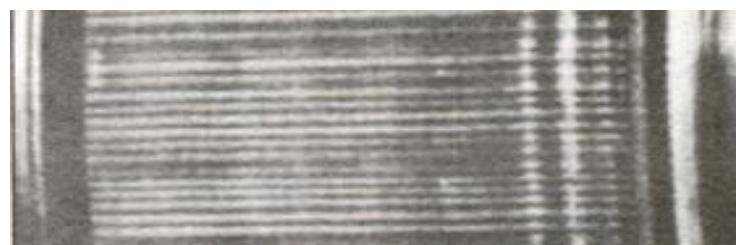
Fluting or corrugation, resulting from electric current passing through rotating bearing (Bearing parts affected must be rejected)
